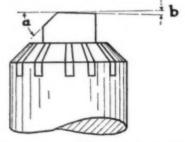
Fig. A. Diamond Tool for turning and boring with diamond brazed in holder.
